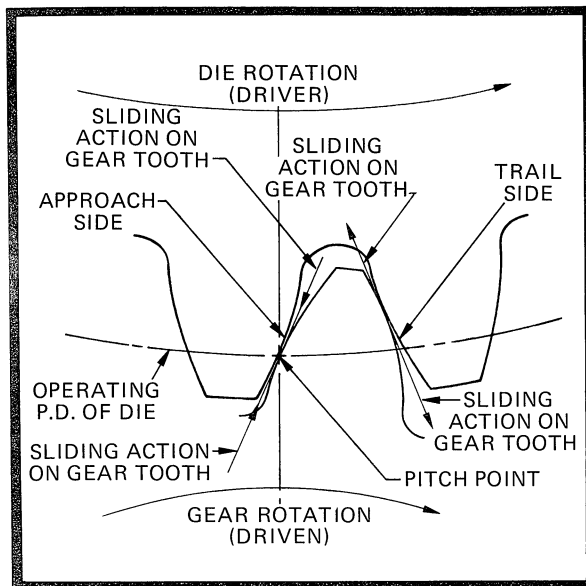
Differing flow directions induced by each side of a die tooth with gear roll-finishing.
